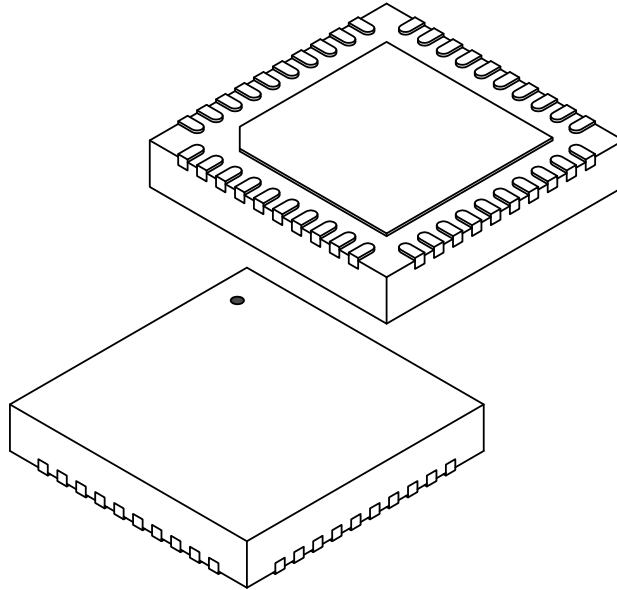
40-VQFN PACKAGE (DRAWING)
